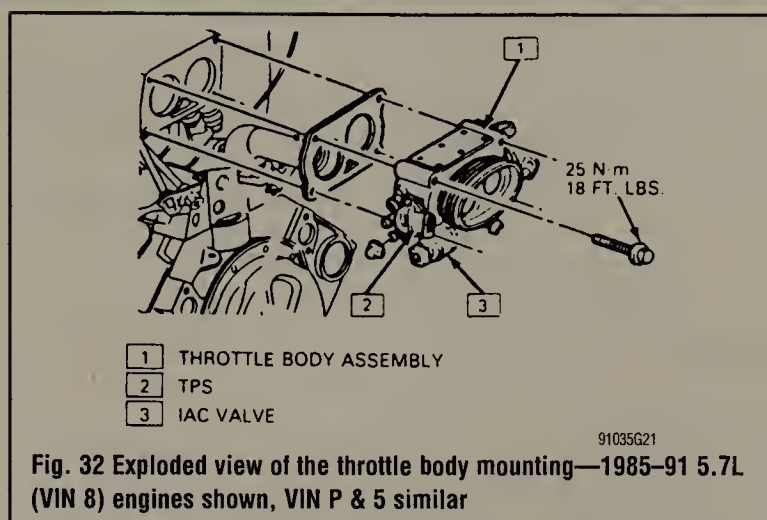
Exploded view of the throttle body mounting—1985-91 5.7L (VIN 8) engines shown, VIN P & 5 similar
